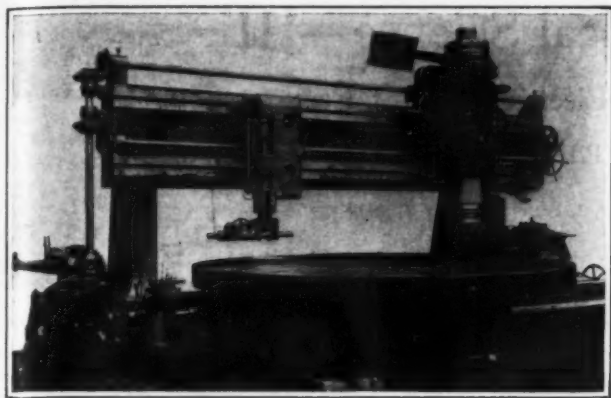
Round and oval hole cutting machine, electrically driven and controlled.
